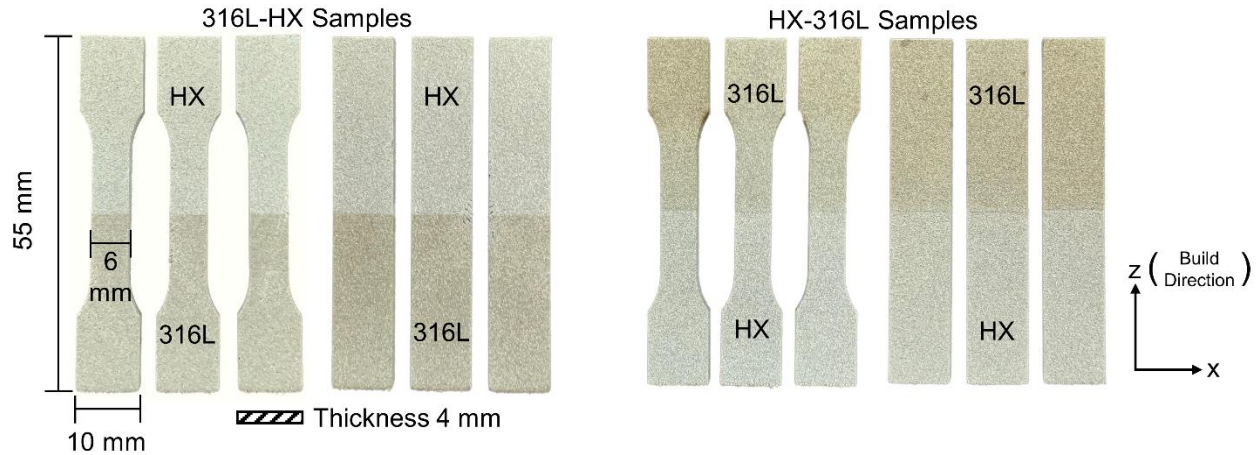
Manufactured samples of 316L-HX and HX-316L. Critical dimensions are the same for both tensile and flexural specimens. Tensile test specimens gauge length is 30 mm.
